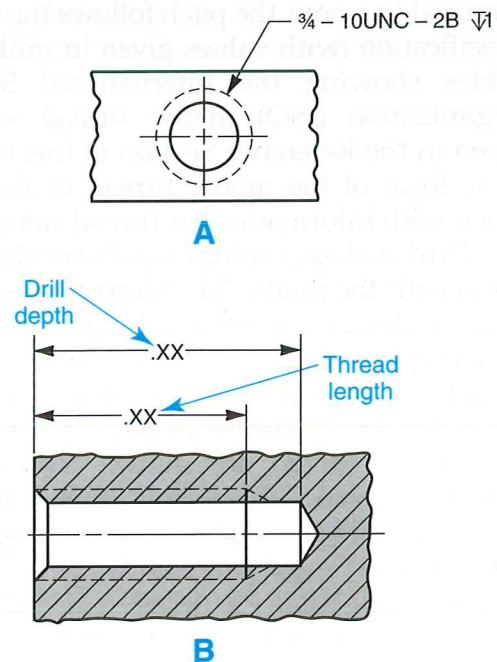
Internal thread specifications on drawings. A—An internal thread can be specified with a callout to the circular view. B—An internal thread can also be specified by dimensions in a section view. (Bottom: American Society of Mechanical Engineers)
